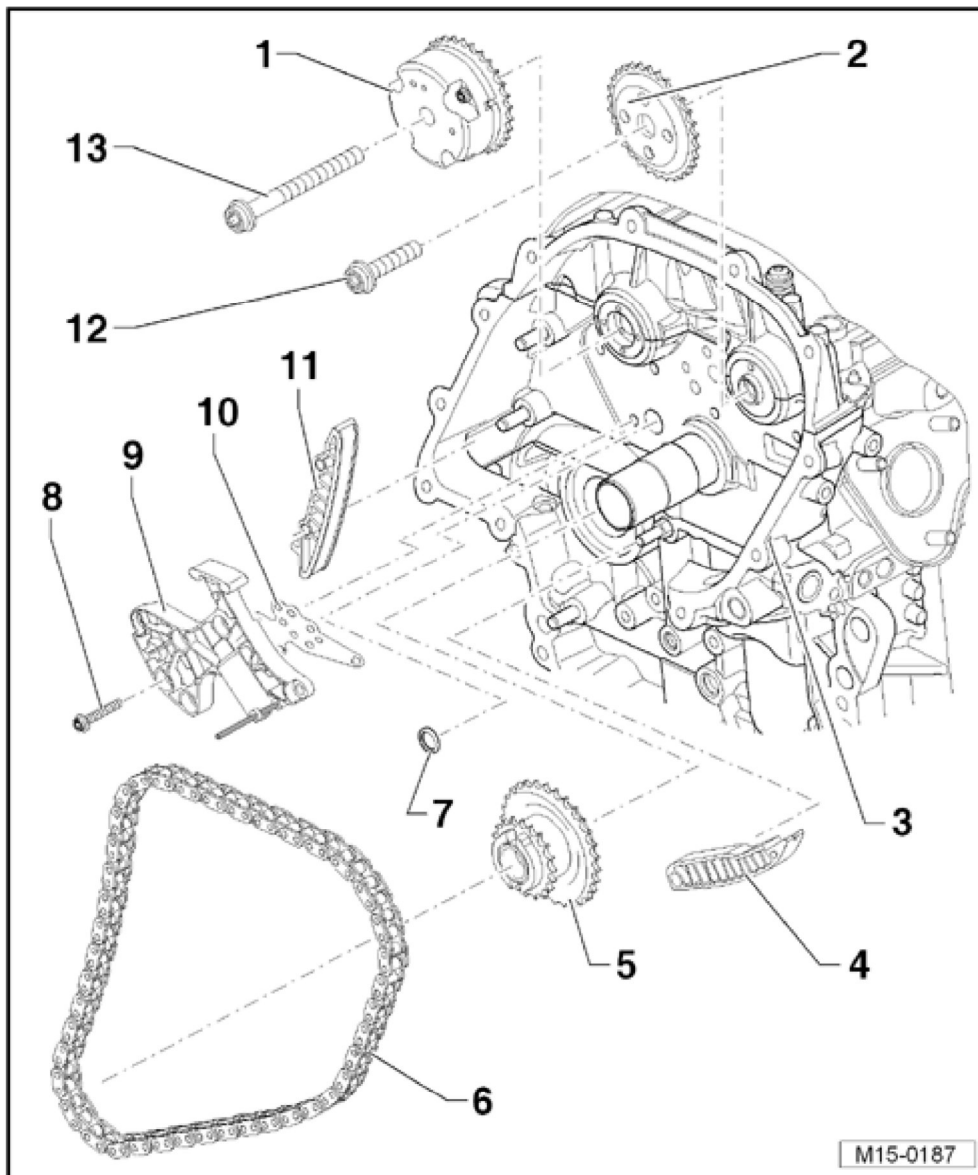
Identifying Chain Drive / Timing Chain Assembly Overview
